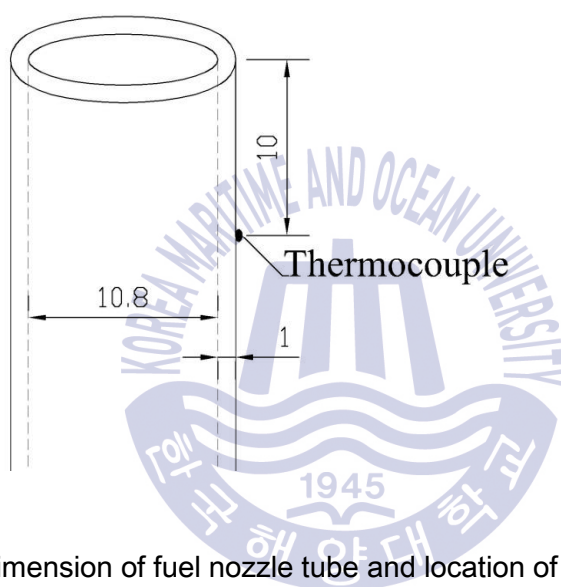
Dimension of fuel nozzle tube and location of the thermocouples
